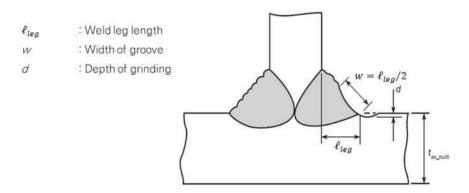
Extent of weld toe burr grinding to remove inter-bead toes on weld face
